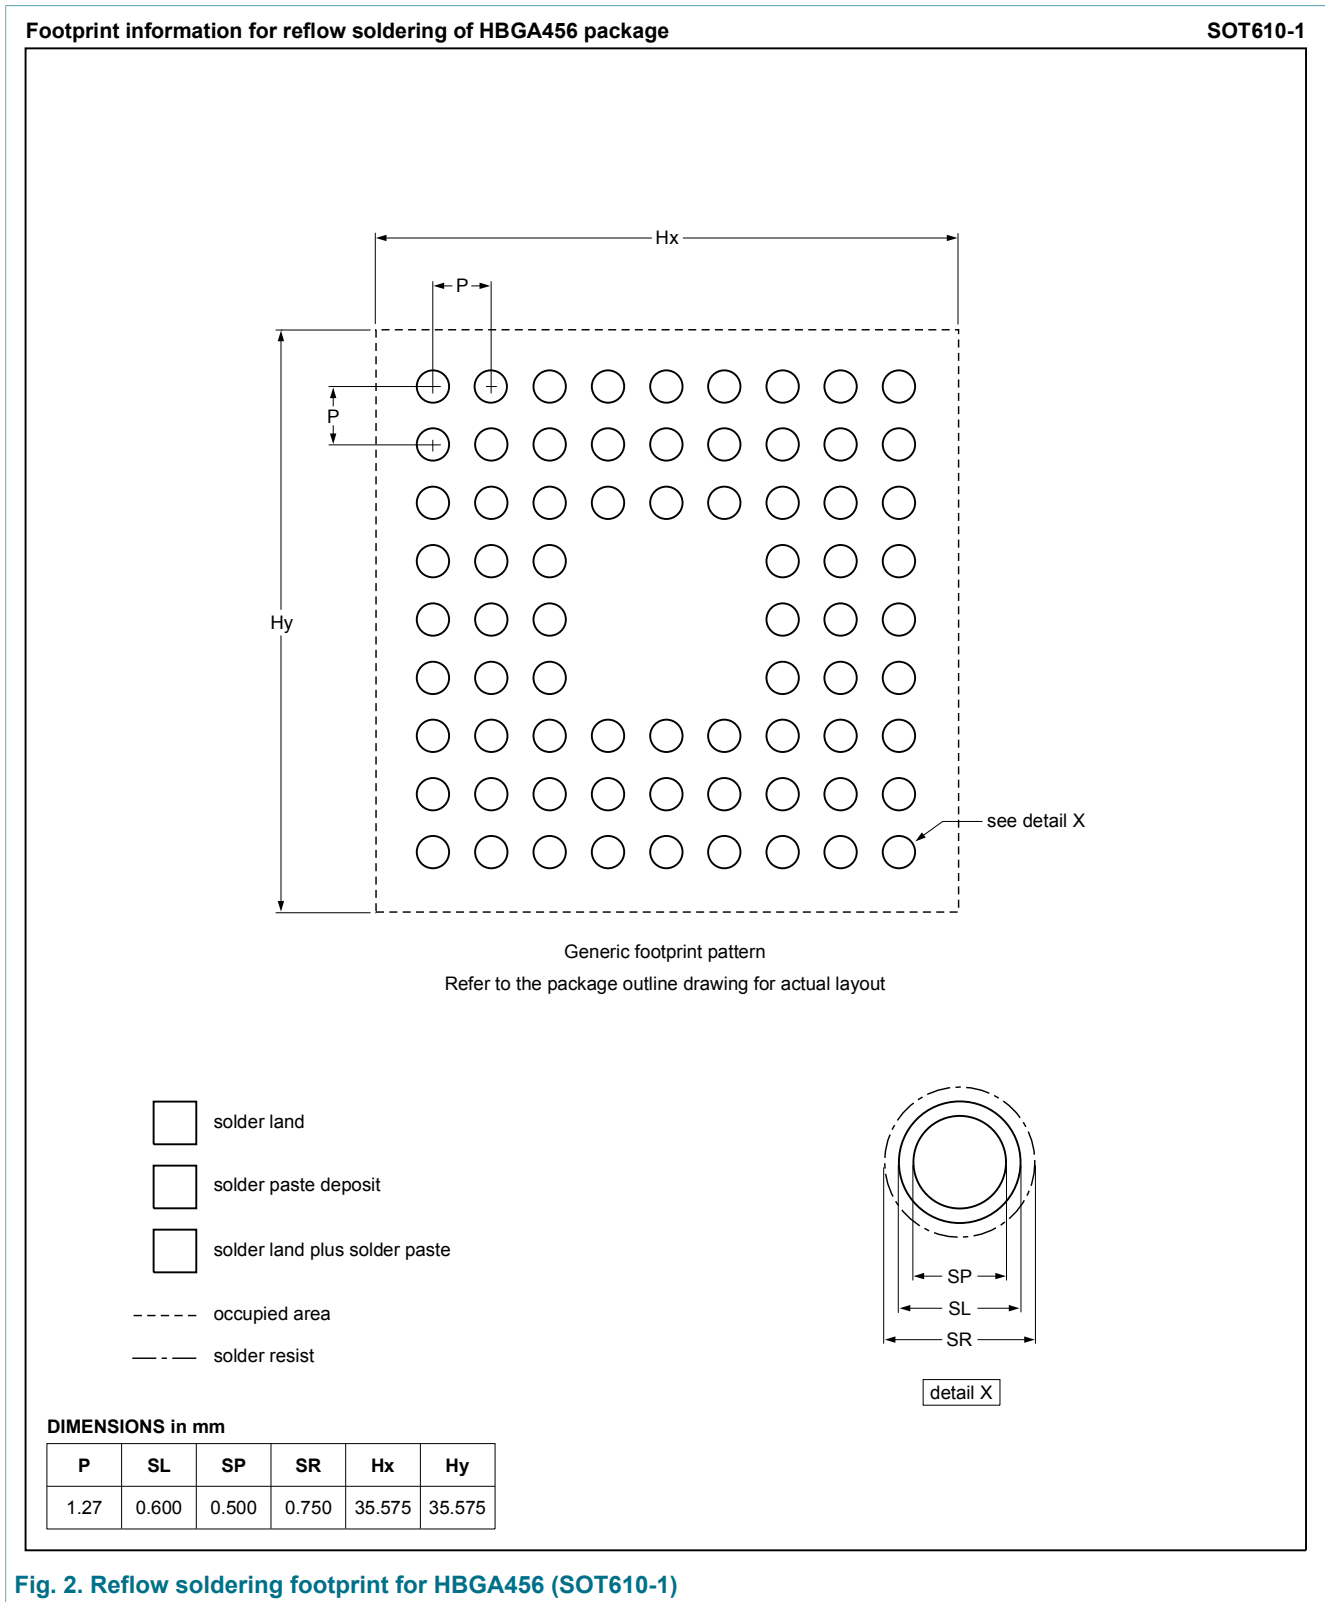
Reflow soldering footprint for HBGA456 (SOT610-1)
